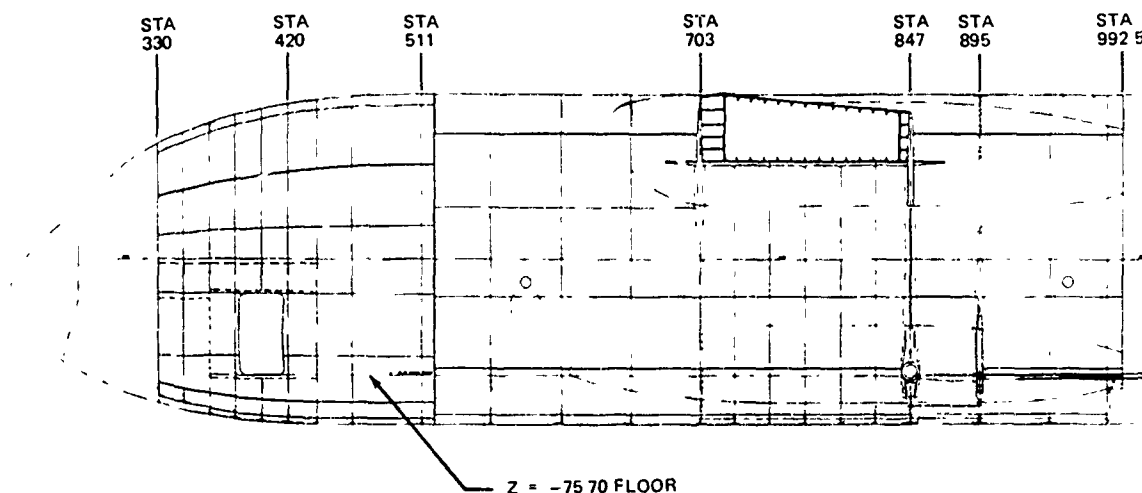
SIDE VIEW - HONEYCOMB CONCEPT
